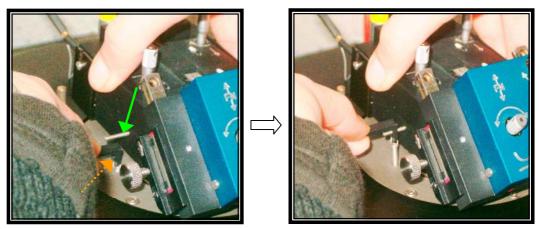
With one hand steady the head, while with the other hold a retaining spring. You will notice that the L-shaped piece of the retaining spring has a hole (marked by the orange dotted arrow). You have to place the L-shaped piece into the side screw (marked with a continuous green arrow), using the retaining spring hole.
